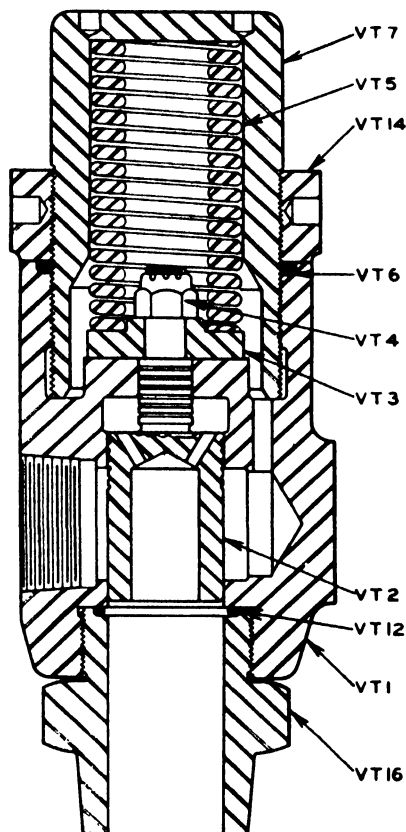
Differential relief valve. (Hydro-Power Inc., Mount Gilead, Ohio.)
